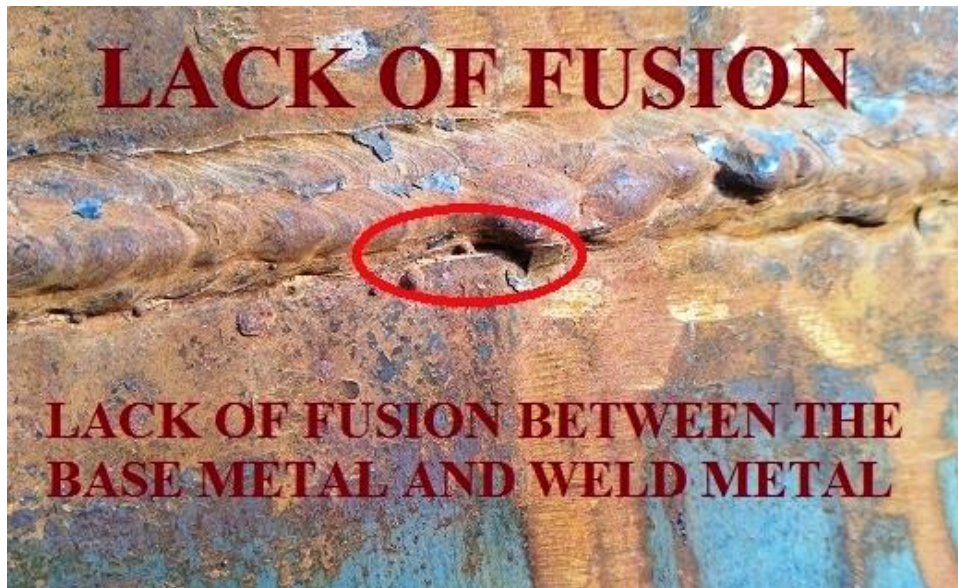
Incomplete Fusion between Base Metal and Weld Metal (Anand, 2017)
